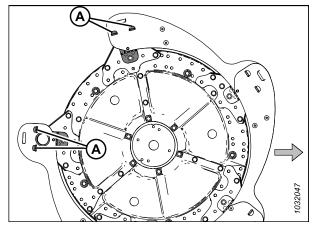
Reel Endshield Removed – Inboard Cam End
